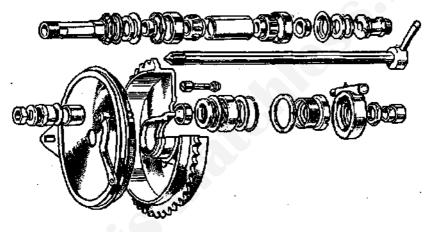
ARRANGEMENT OF REAR BRAKE DRUM 1955-56 MODELS.
